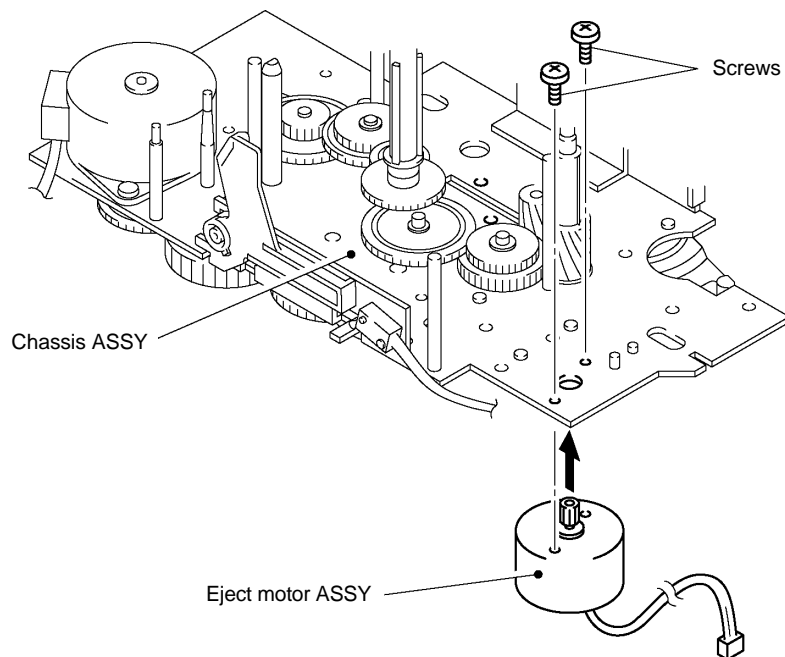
Reassembling the Eject Motor ASSY
